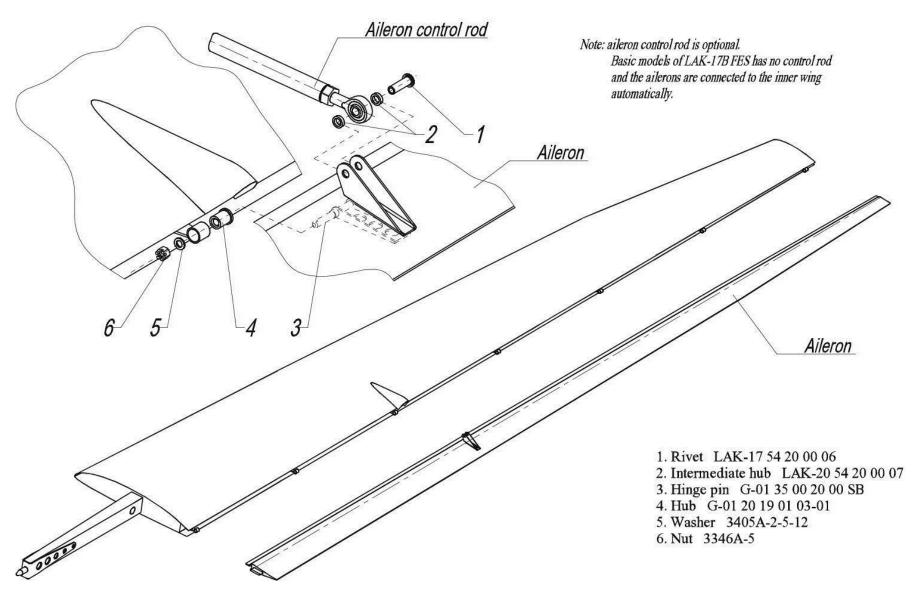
01$. Mounting of aileron of outer wing
